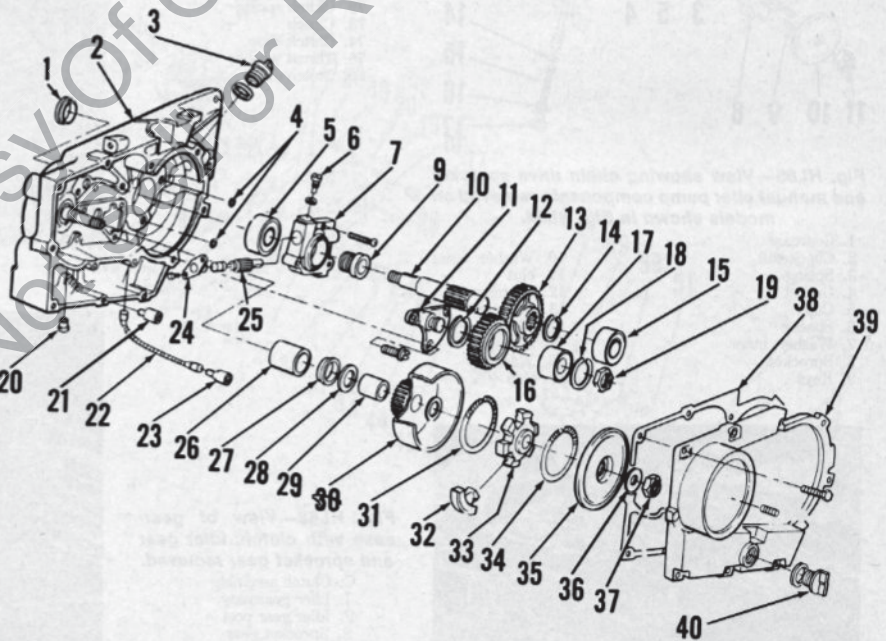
Exploded view of gear drive assembly used on Models S1130G and 3100G. Refer to Fig. HL65 for view of opposite side of gearcase and chain drive sprocket. Ratios of 2:1 and 3:1 can be obtained by changing gear (13) and repositioning idler gear assembly to accommodate the different gear diameter. The 2:1 ratio gear has 42 teeth and the 3:1 ratio gear has 64 teeth.
